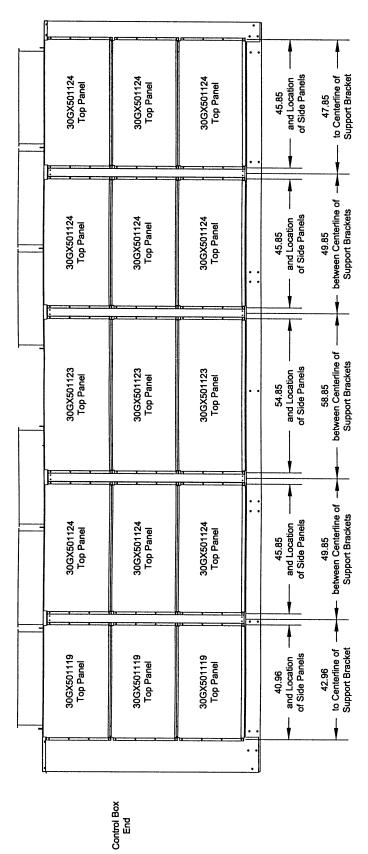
E — Unit Assembly, 30GX205, 225 Oil Separator Side Only
